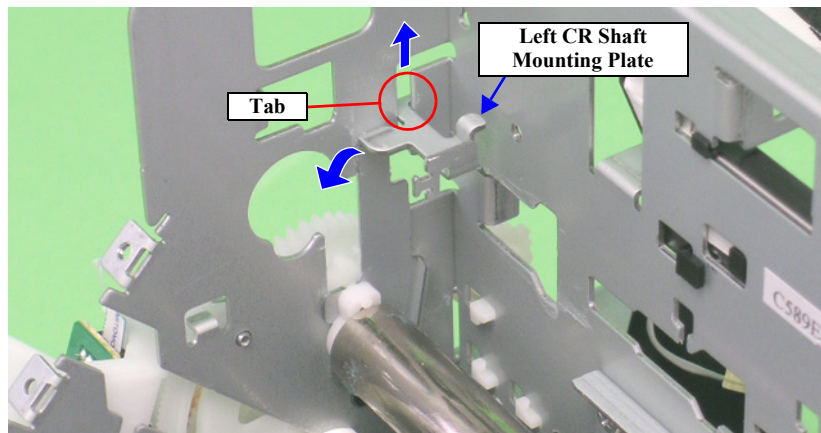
Rotating the Left CR Shaft Mounting Plate
